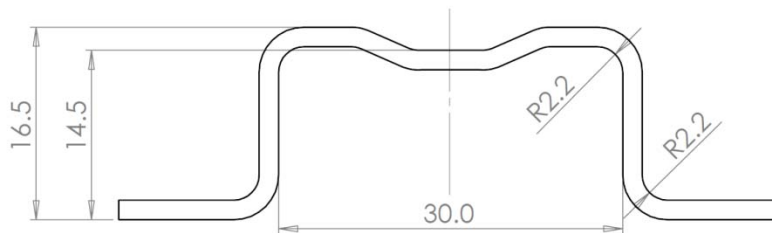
Cross-section of a demonstrator beam (dimensions are in mm)
